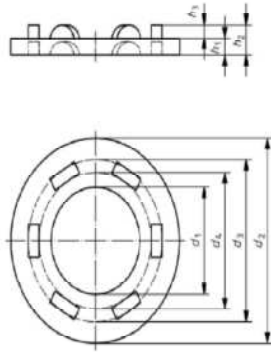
Dimensions of compressible washer-type direct tension indicator (example with six protrusions)
